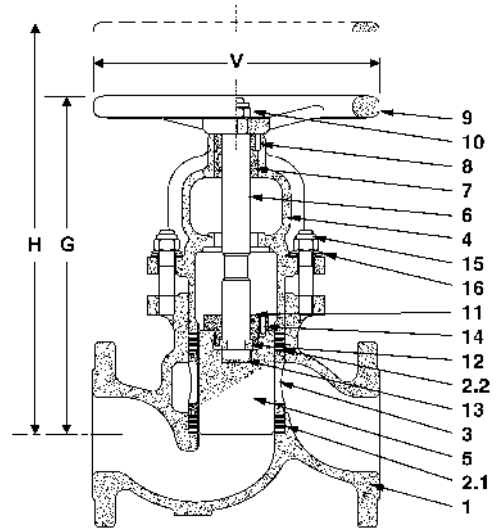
shows the basic design of a BONETTI[®] Piston Valve. The valve consists of a body (1), which is internally fitted with two sealing rings. The lower valve ring (2.1) ensures upstream/downstream seat tightness. The lantern bushing (3) is the spacer between the valve rings. The upper valve ring (2.2) ensures tightness to the atmosphere. The two valve rings are compressed by the bonnet (9), which is compressed by the stud bolts and nuts (10) and by the Belleville washers (11). The latter compensates for expansion due to temperature variations.
